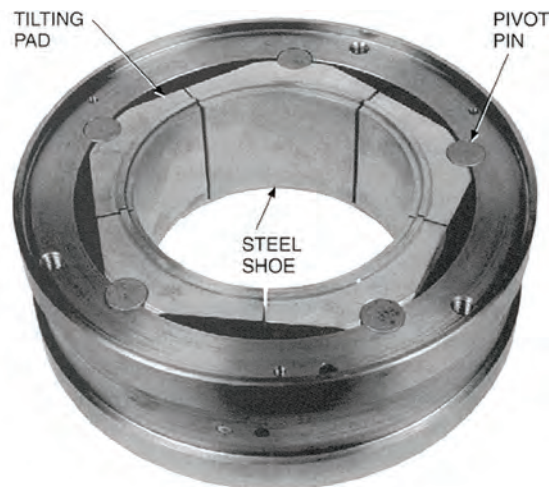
Typical radial tilting pad bearing (courtesy of Solar Turbines Incorporated).
